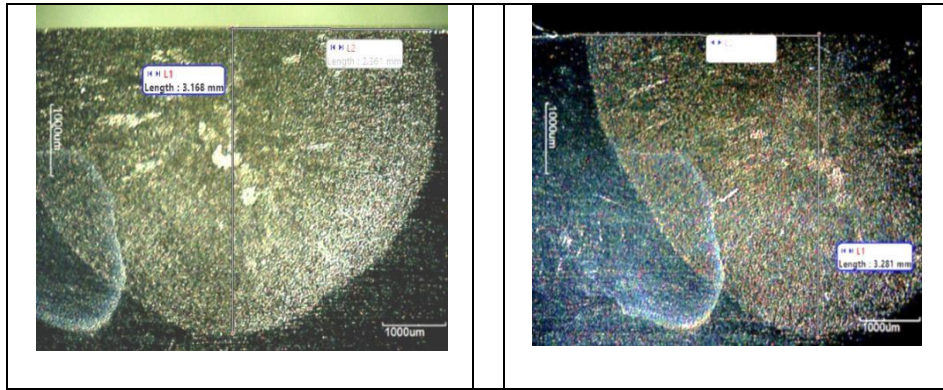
View of weld bead of Serial No. 21 (a) 1st pass and (b) 2nd Pass done on two sides
